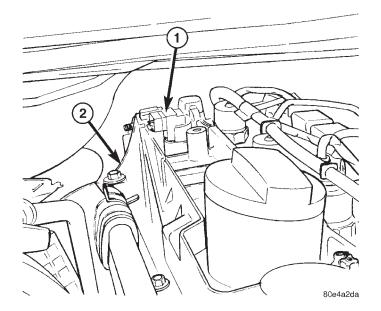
CAMSHAFT POSITION SENSOR LOCATION
